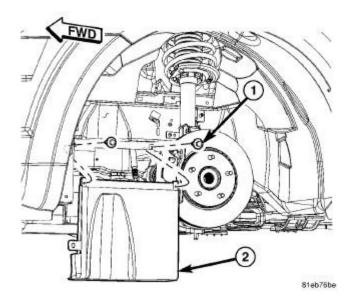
Left Lower Splash Shield Courtesy of CHRYSLER LLC
